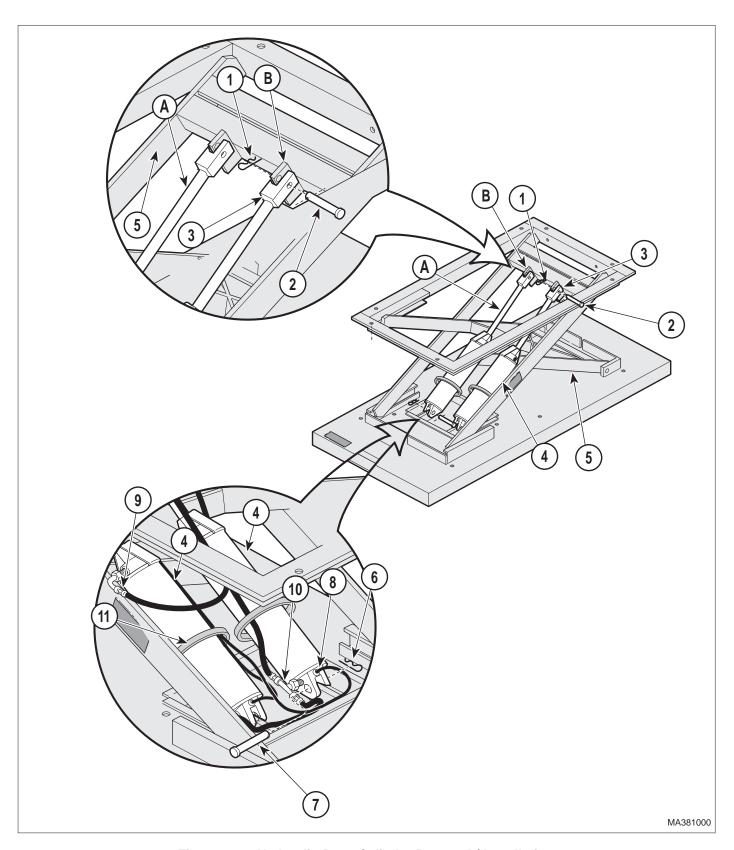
Hydraulic Base Cylinder Removal / Installation
